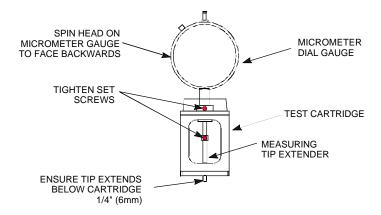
Setting Up Tools from Height Gauge Kit.
